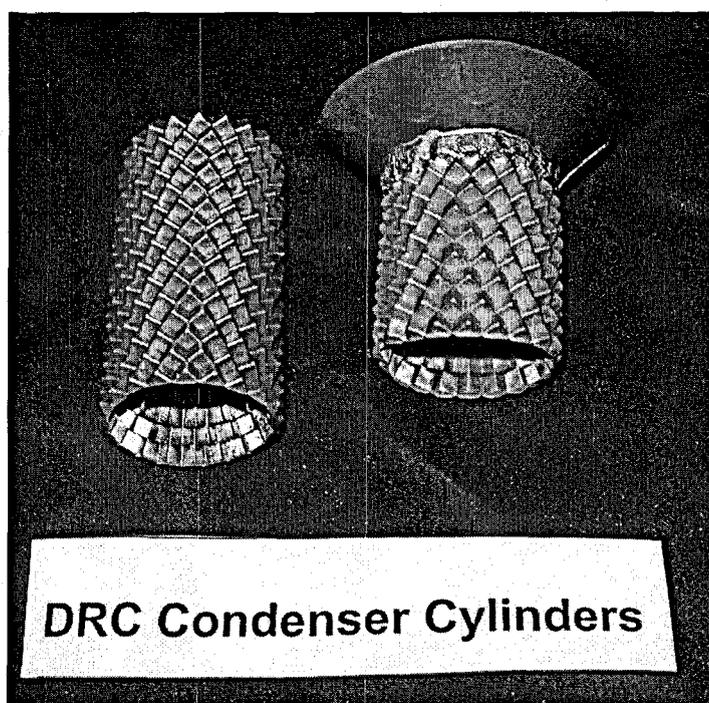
Nickel Corner Cube Cylindrical Converter Wall Liners.
